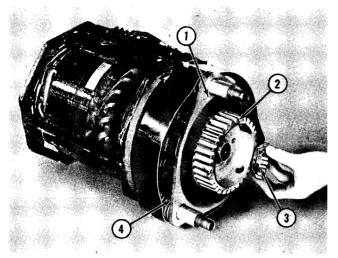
REMOVING BRAKE HUB LOCKNUT 1. Floating Plate 3. Locknut 2. Brake Hub 4. Spring
